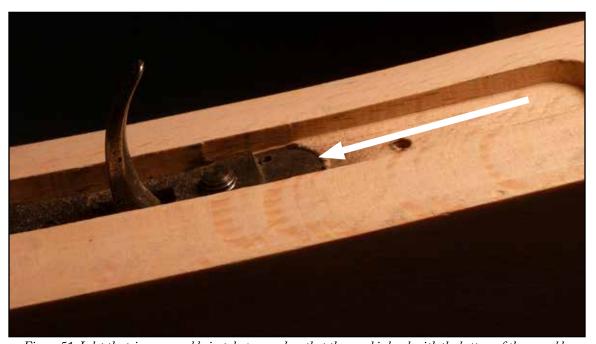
Inlet the trigger assembly just deep enough so that the wood is level with the bottom of the assembly.
